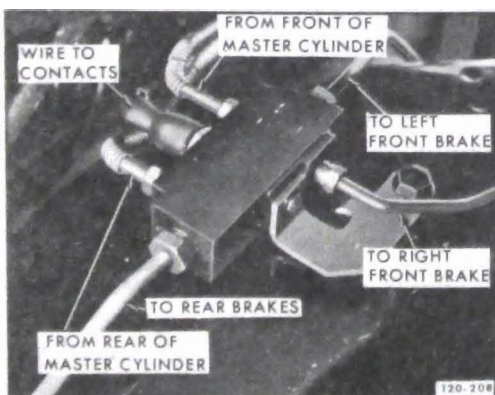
Distributor and Brake Failure Warning Switch Assembly
